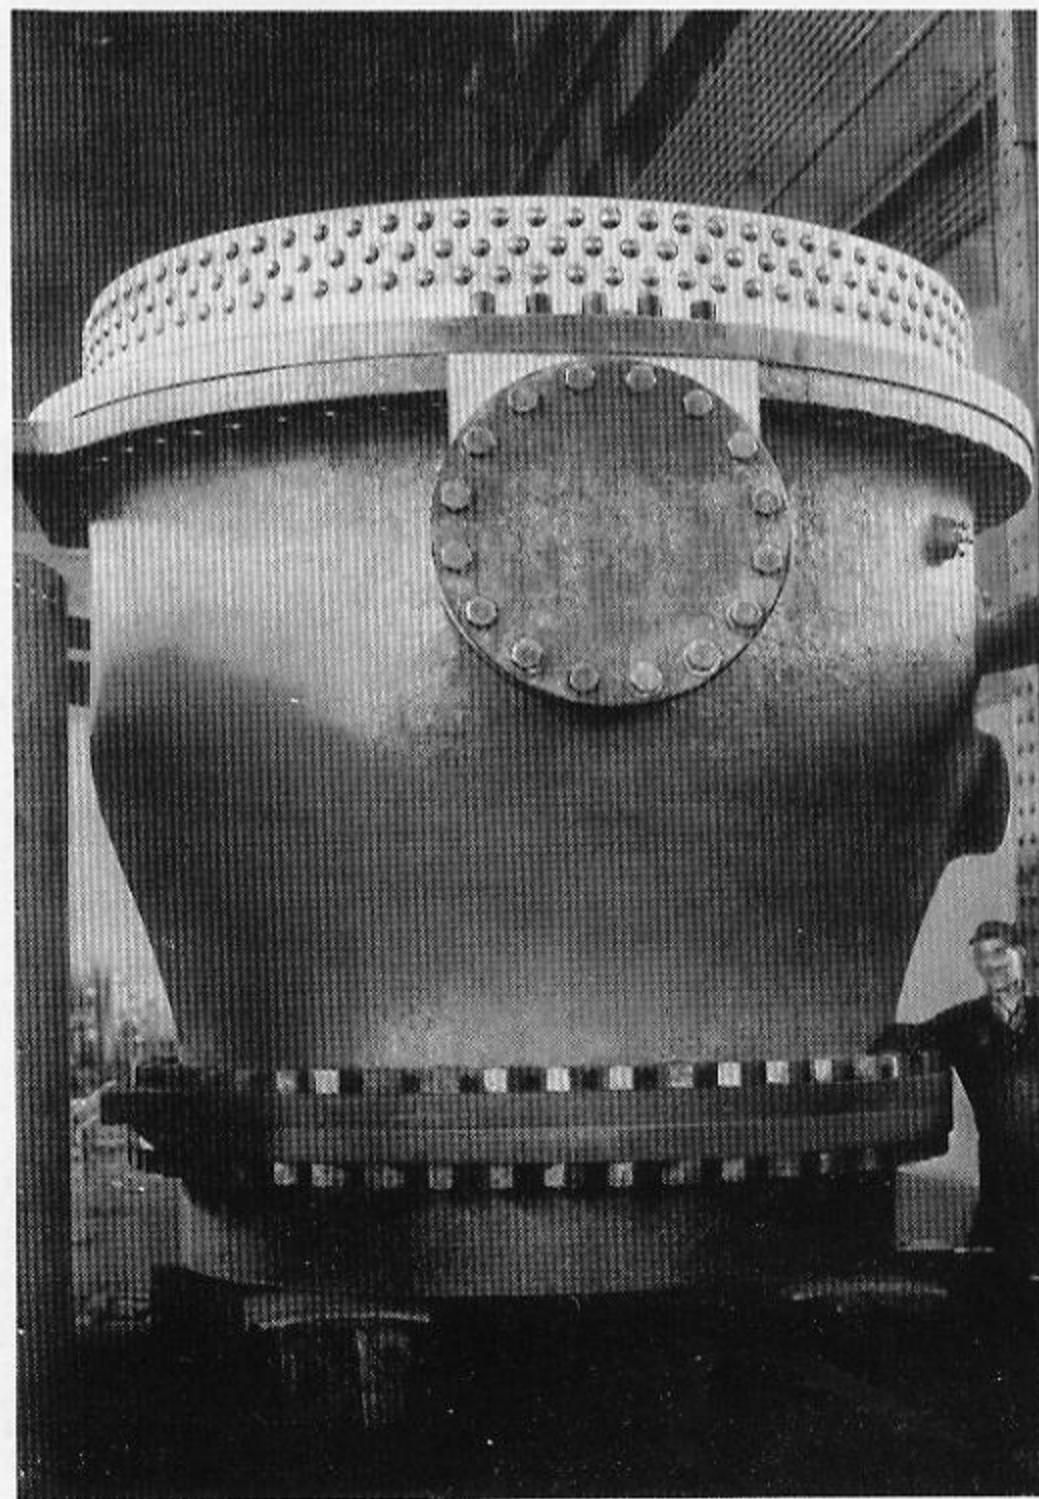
Cast steel housing for 108 inch butterfly type valve. Valve operates under a static head exceeding 900 ft.
